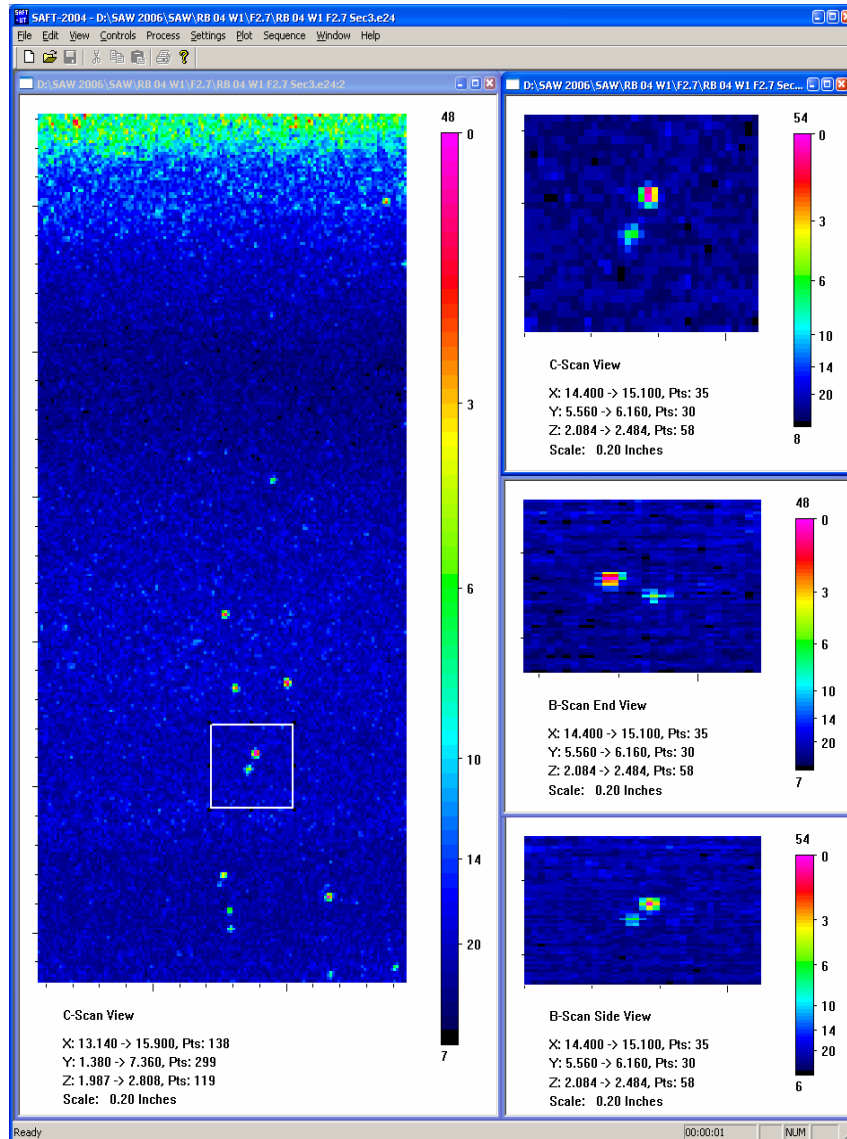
F2.7 Immersion Testing Images of Small Fabrication Flaw: *RB04-5.5
